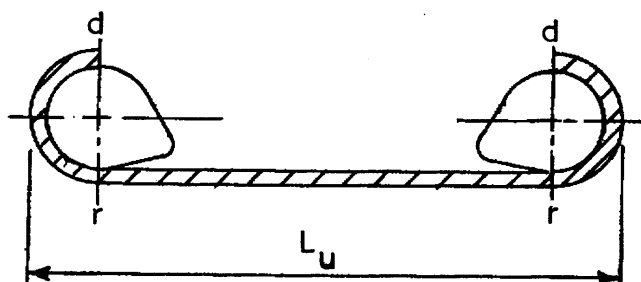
TEST PIECE MOUNTED ON COR.DE.CHASSE GRIPS.
